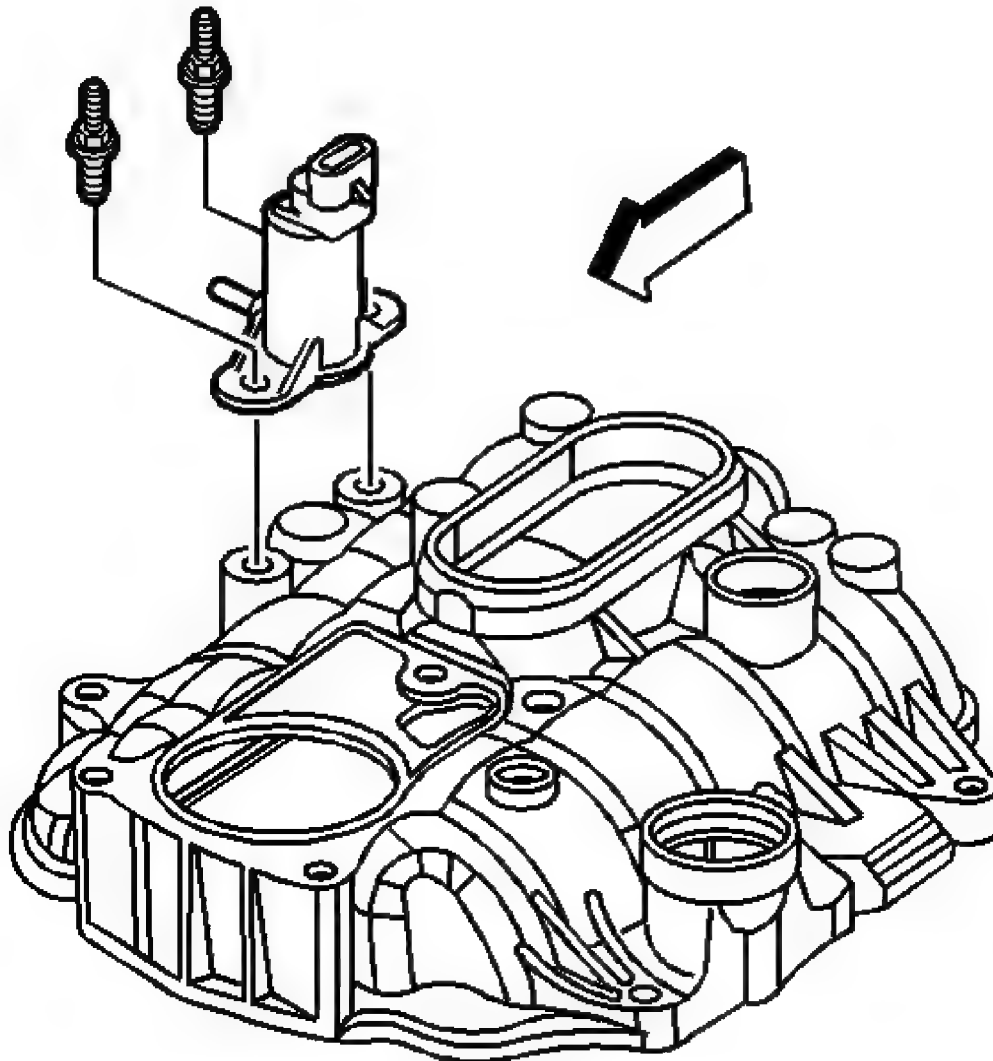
Locating EVAP Canister Purge Solenoid Valve
